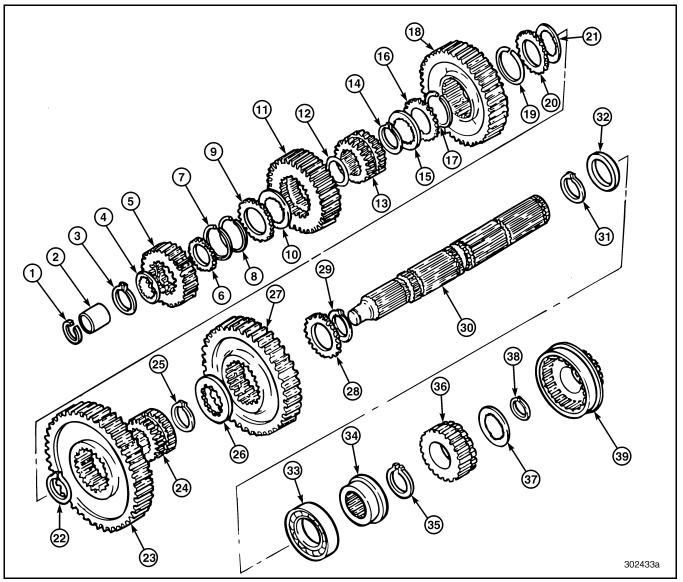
Exploded View of Front Mainshaft, T313-T318(21)(L21)(LR21)
